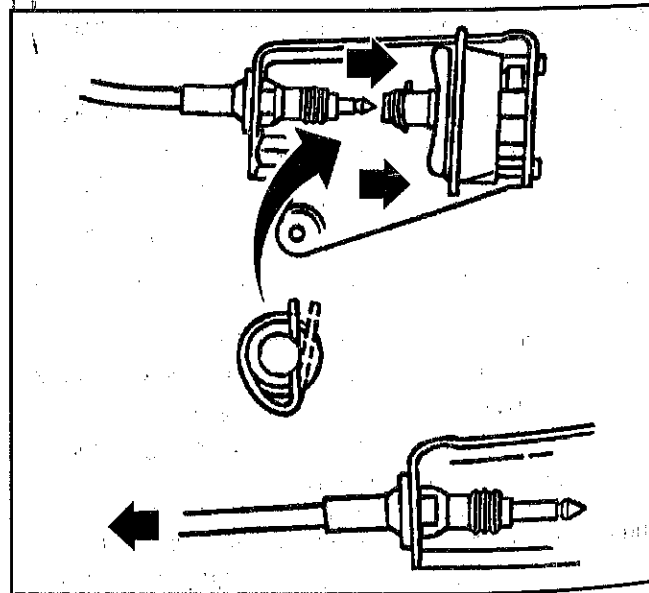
Disconnecting the Shift Cable from the Vacuum Actuator
